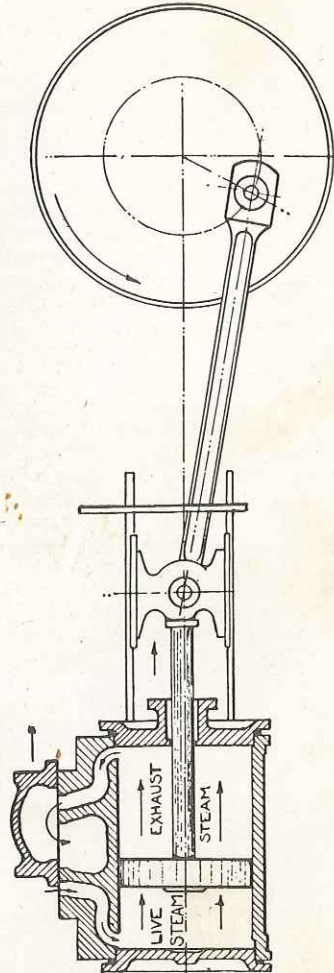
shows the location of eccentric relative to the crank pin when the motion of eccentric is transmitted to the valve through a rocker arm and this form of valve gear is known as "indirect motion." In these illustrations the eccentric is set 90 degrees or at right angles to the crank pin.
